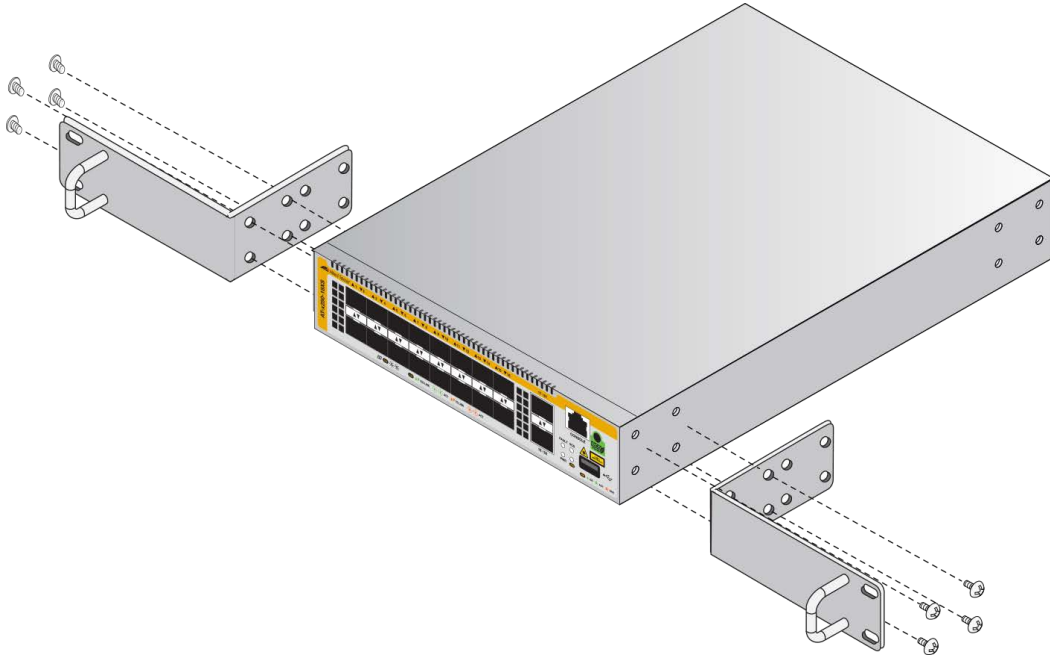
Attaching the RKMT-J14 Brackets to the Switch
